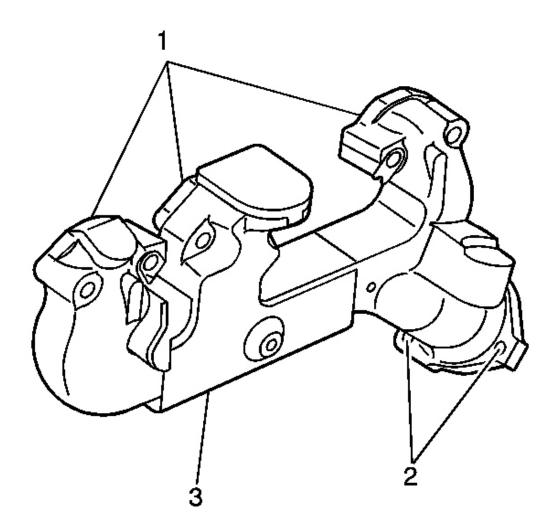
Exhaust Manifold Inspection Areas Courtesy of GENERAL MOTORS CORP.
